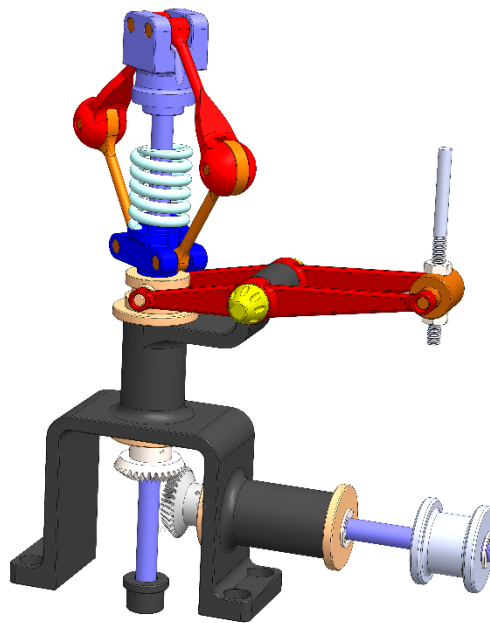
Vertical steam regulator design used for AGC tolerancing exercises
